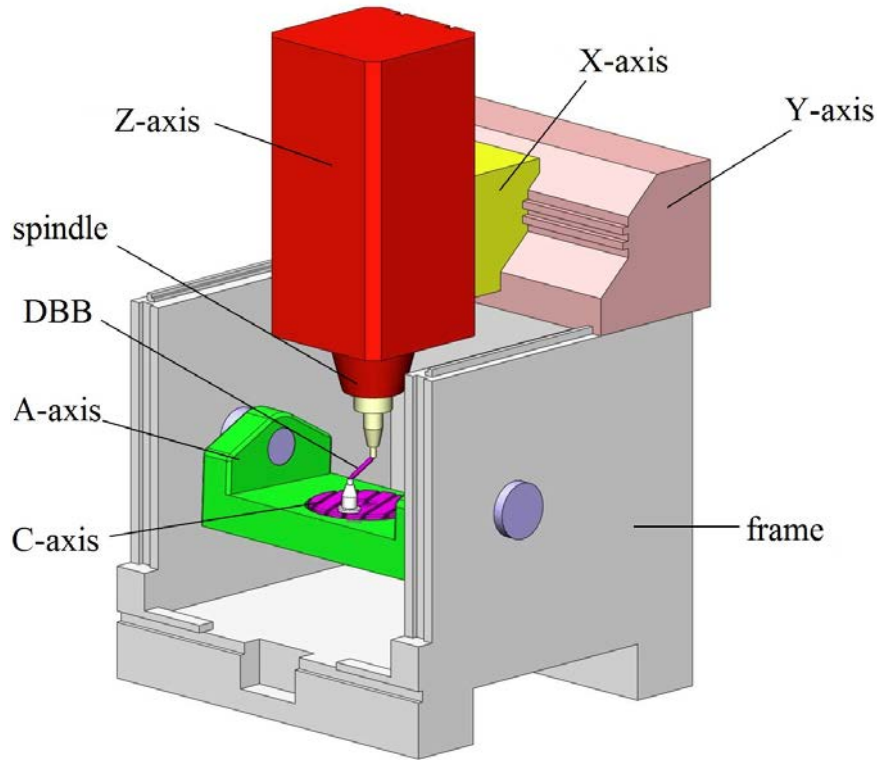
A schematic view of the Hermle C600U 5-axis machine tool structure.
